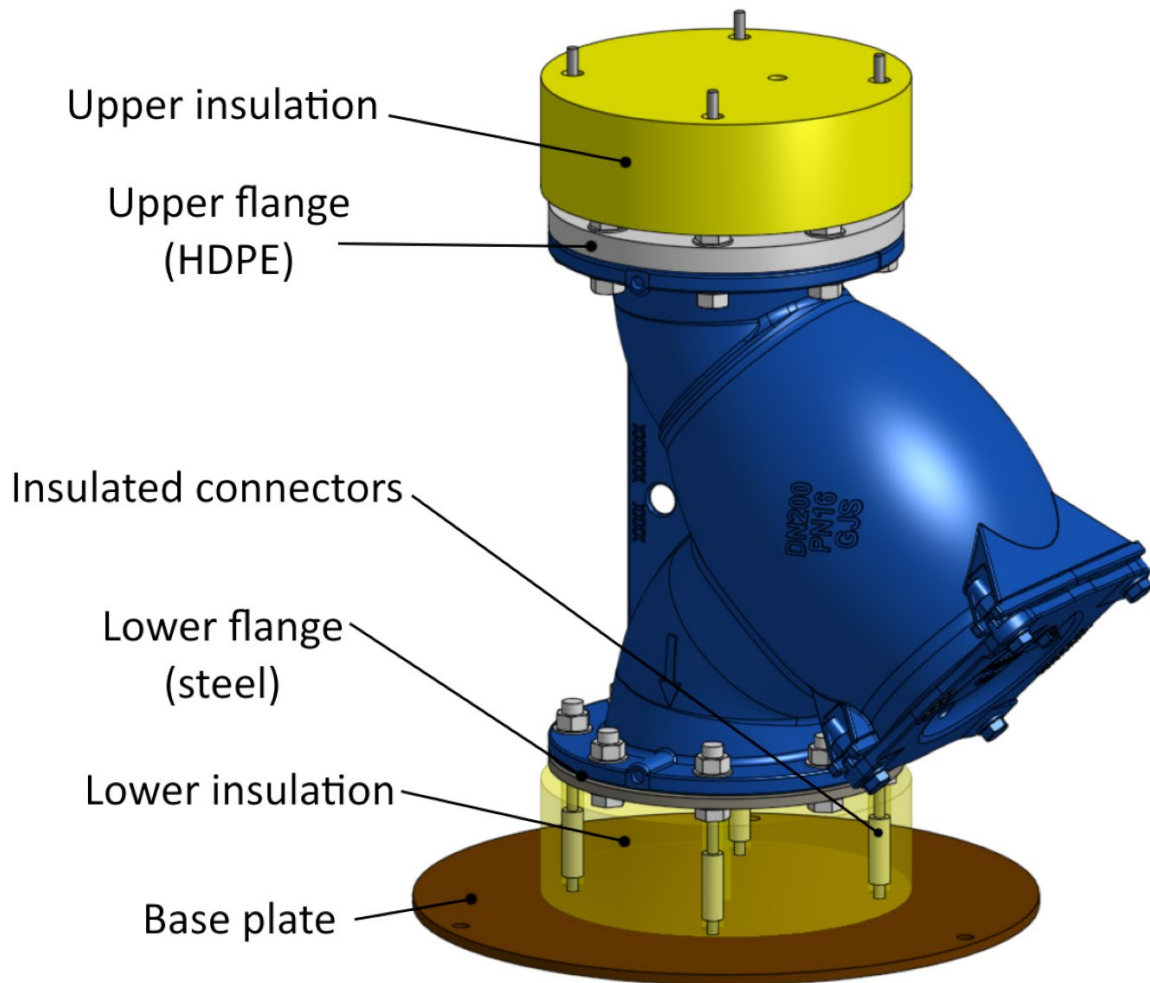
Test assembly showing its main components. The lower insulation block is shown semi-transparent.
